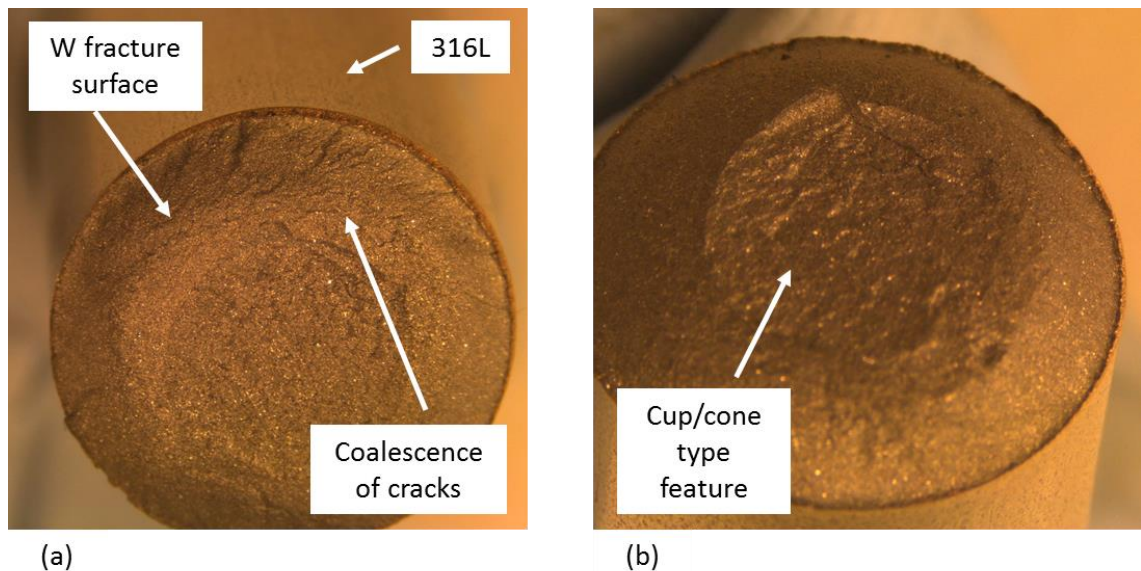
Fracture surface of W-AuCu-316L failed part following thermal autofrettage
